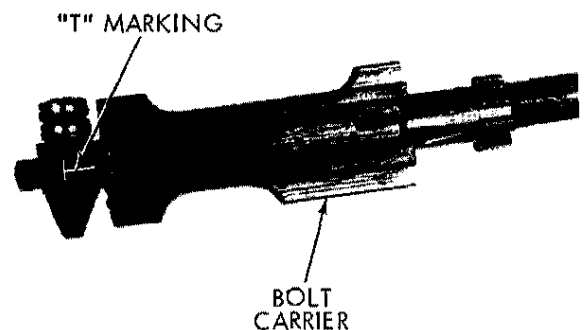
"T" MARKING IN CARRIER CAP ASSEMBLY IN LINE WITH TOP OF BOLT CARRIER
